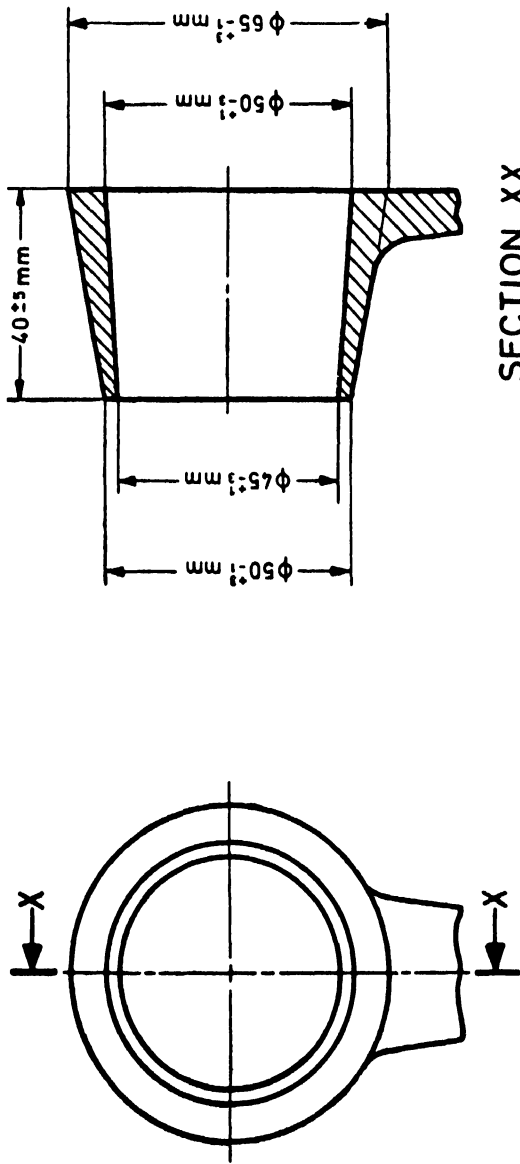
SHAPE AND DIMENSIONS OF EYE FOR POWRAH
